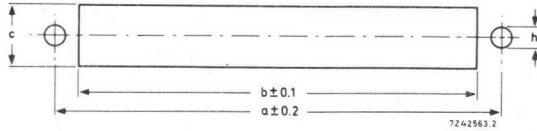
Panel mounting; for dimensions a and b, see Table 2.
